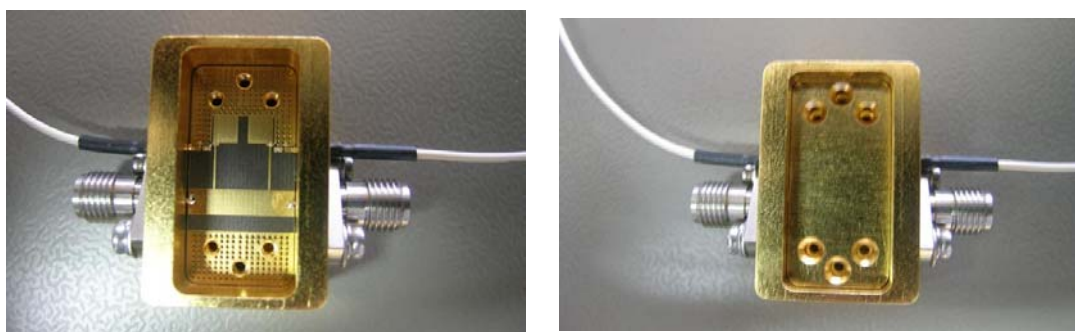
Fabricated and Assembled Components of the Prototype Filter.
